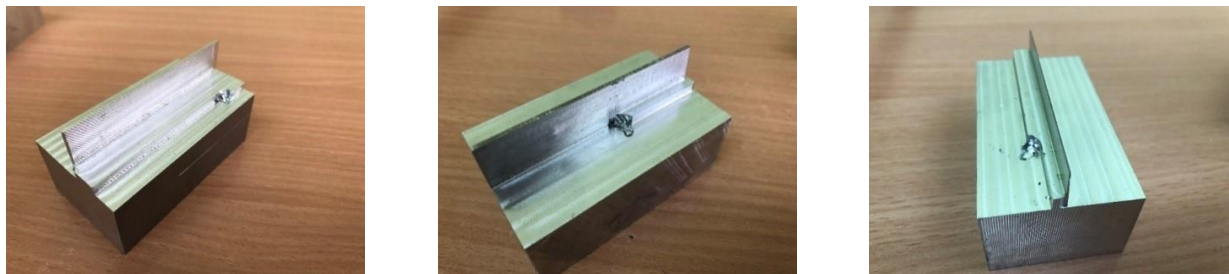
Depth at which the tool fractures appeared while machining samples 5,6 and 7 respectively
